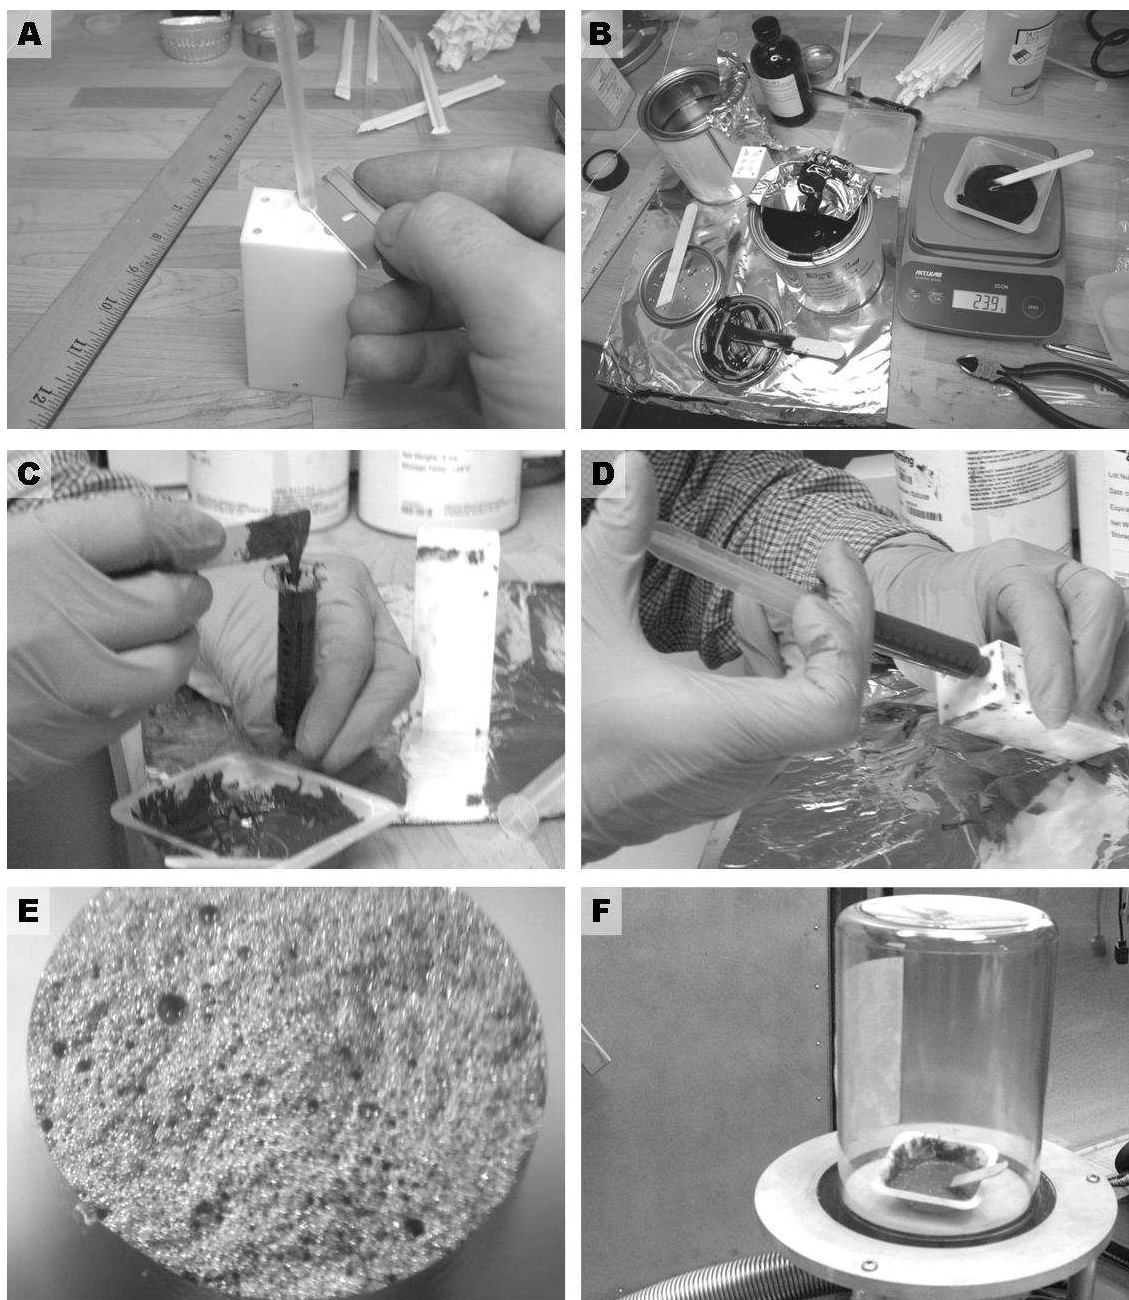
Some aspects of making powder filters. A. Drinking straws used as mold liners. B. Mixing the bronze/epoxy paste. C. Spooning the paste into a syringe. D. Injecting the paste. E. Bubbles in a test rod. F. Using vacuum to remove bubbles from the paste.
